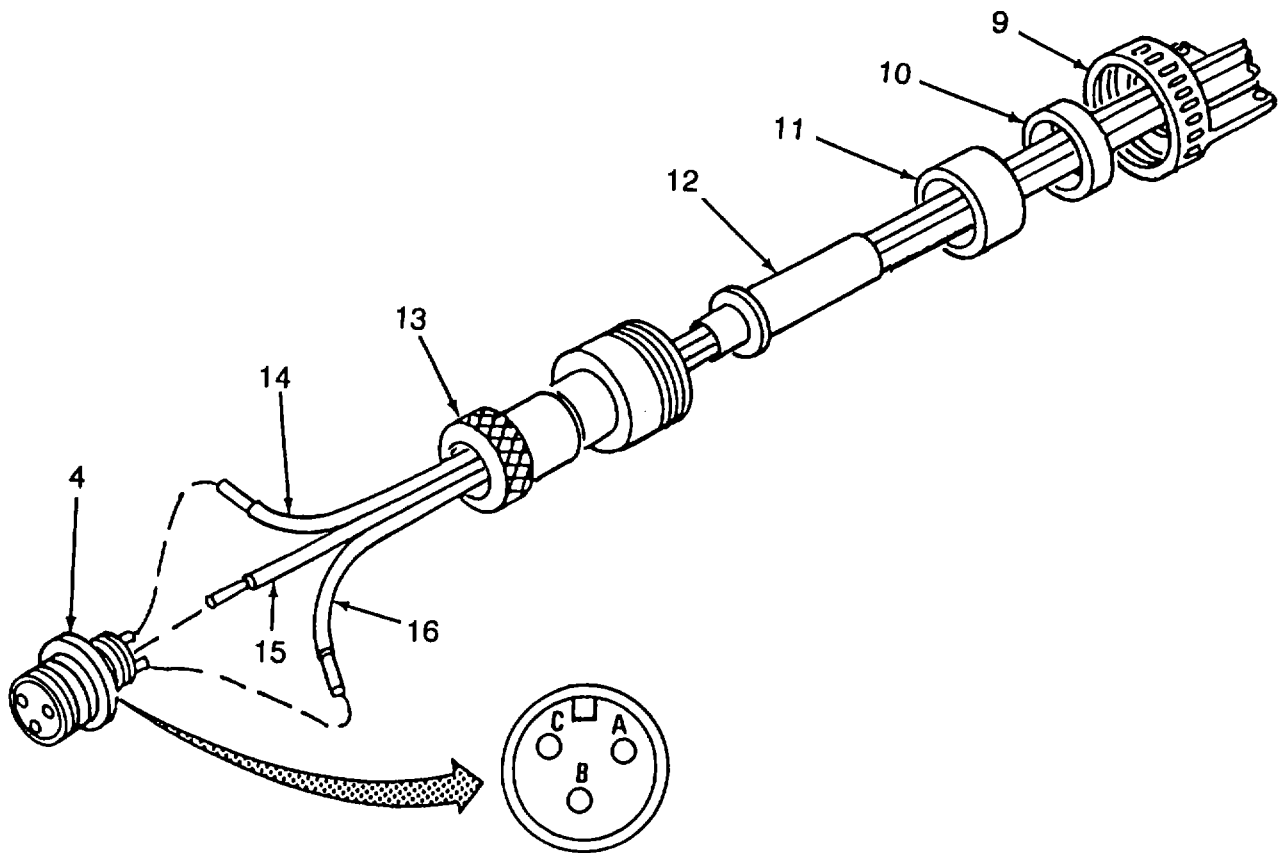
Power Cable Adapter Cord Repair (Sheet 2 of 3)
